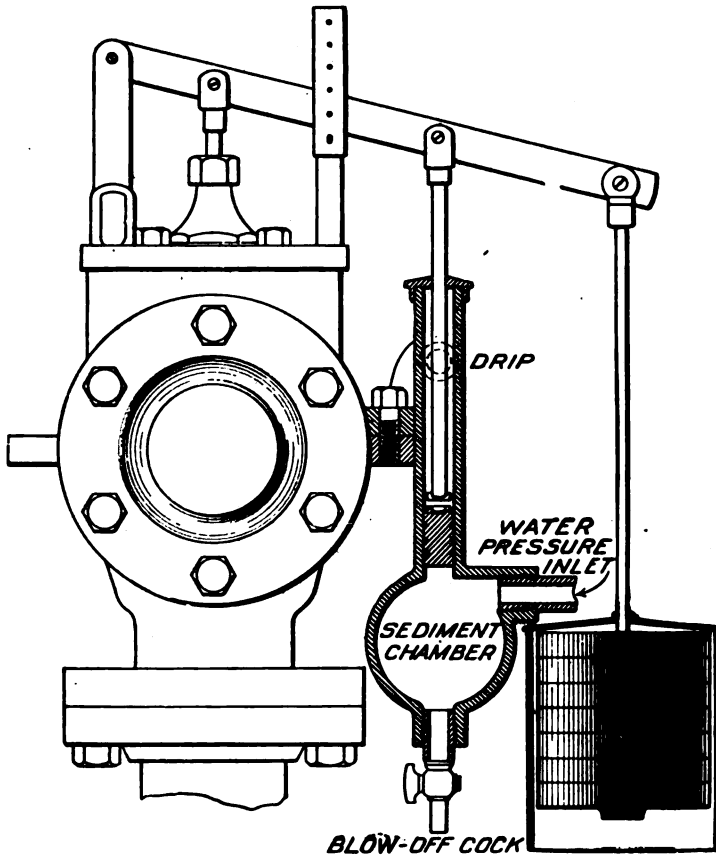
Steam Pump Regulator (Shown Partly in Section) Automatically Operated by Valve Controlled by Float in Supply Tank.
